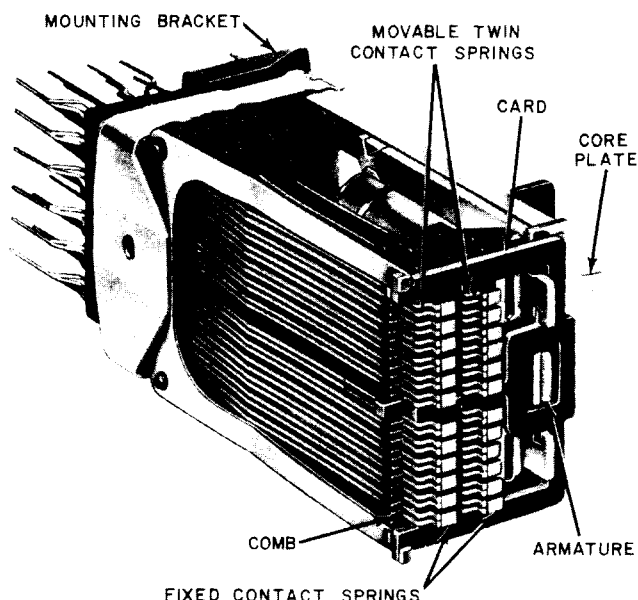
24-Position Wire Spring Relay—Contact Cover Removed Showing 24 Twin Make Contacts
